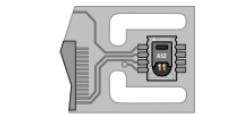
Top view of example of mounted SHT1x with slit milled into PCB to minimize heat transfer.
